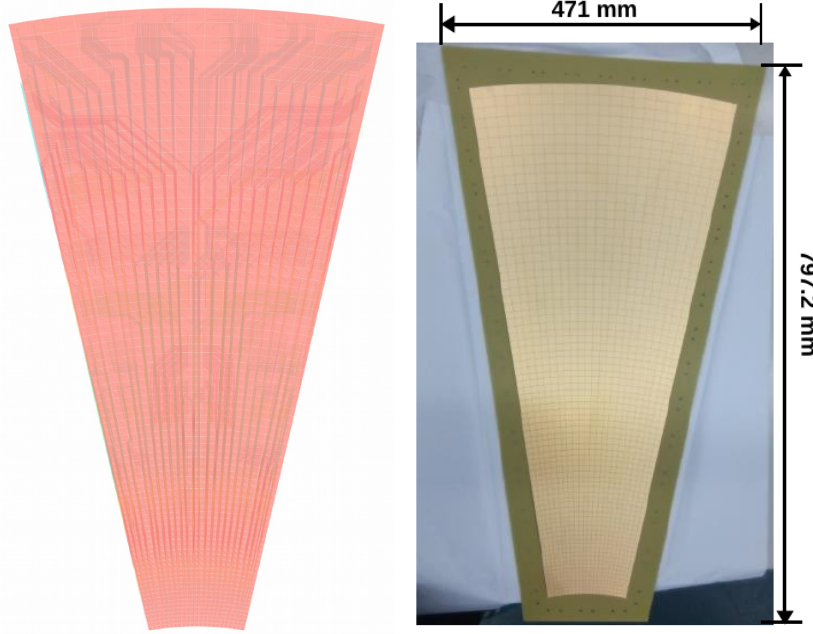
Left: Gerber layout of real-size readout PCB with trapezoidal pads. Right: Photograph of the fabricated readout PCB.
